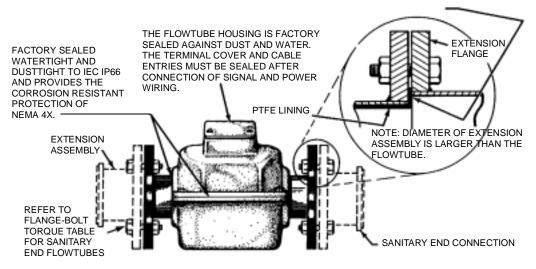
Assembling Sanitary End Connection Assembly to Flowtube
